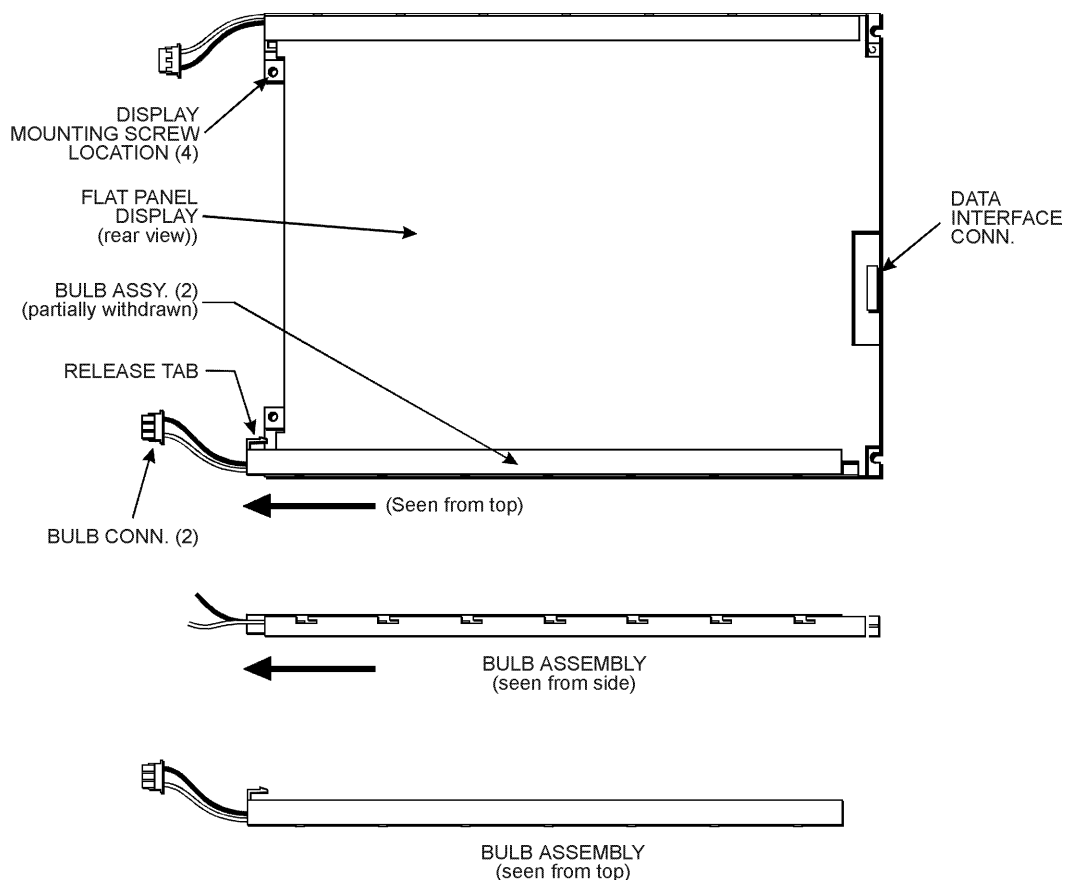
Figure Appendix D -5. Model #KCB8060BSTT-X4 Bulb Assembly - Rear View
